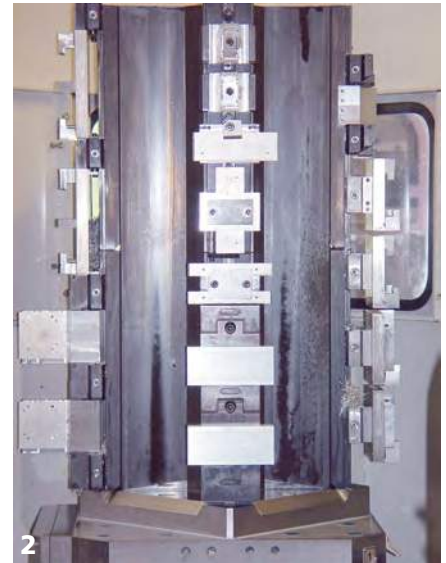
The output of a vertical machine with a fully loaded table surface is similar to that of a horizontal machine.
